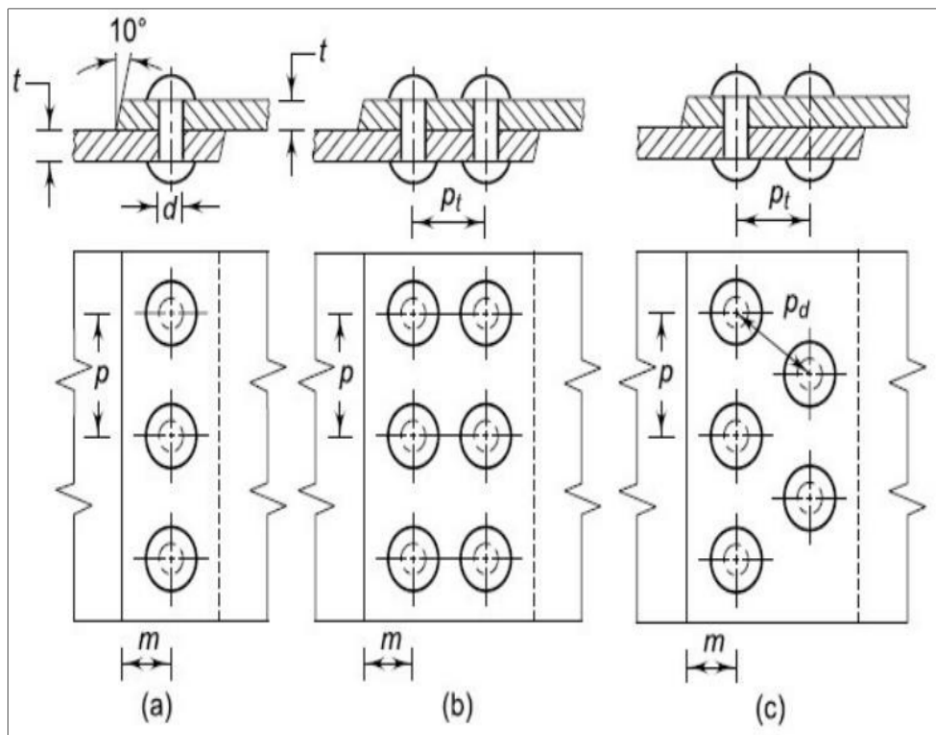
Arrangement of rivets: (a) Single riveted lap joint; (b) Double riveted lap joint (chain pattern); (c) Double riveted lap joint (zig-zag pattern) (A A H Al-Filfily and A A Muhmmmed, 2022; Bhandari, 2010).
